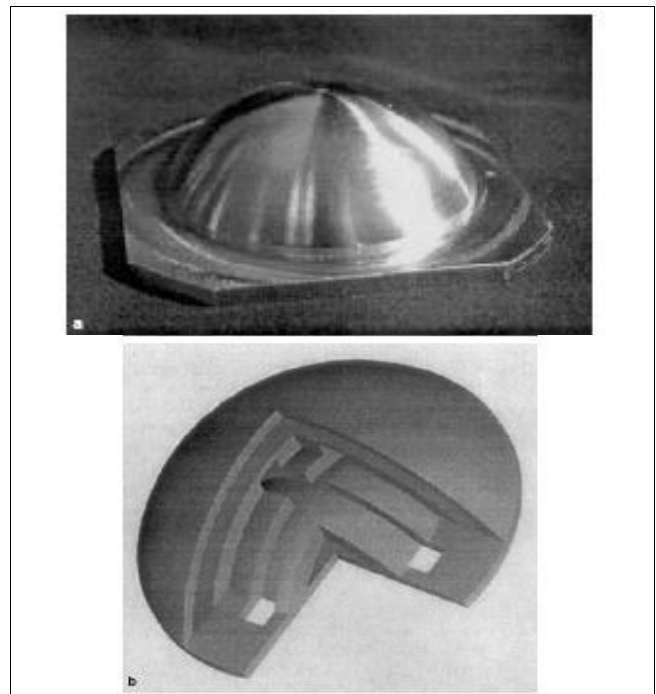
(a) Manufactured part by microcasting (b) CAD representation of the part [1]
